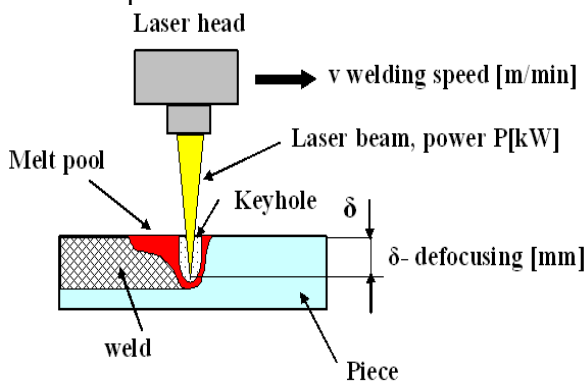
Scheme welding pool with varied parameters in welding process
